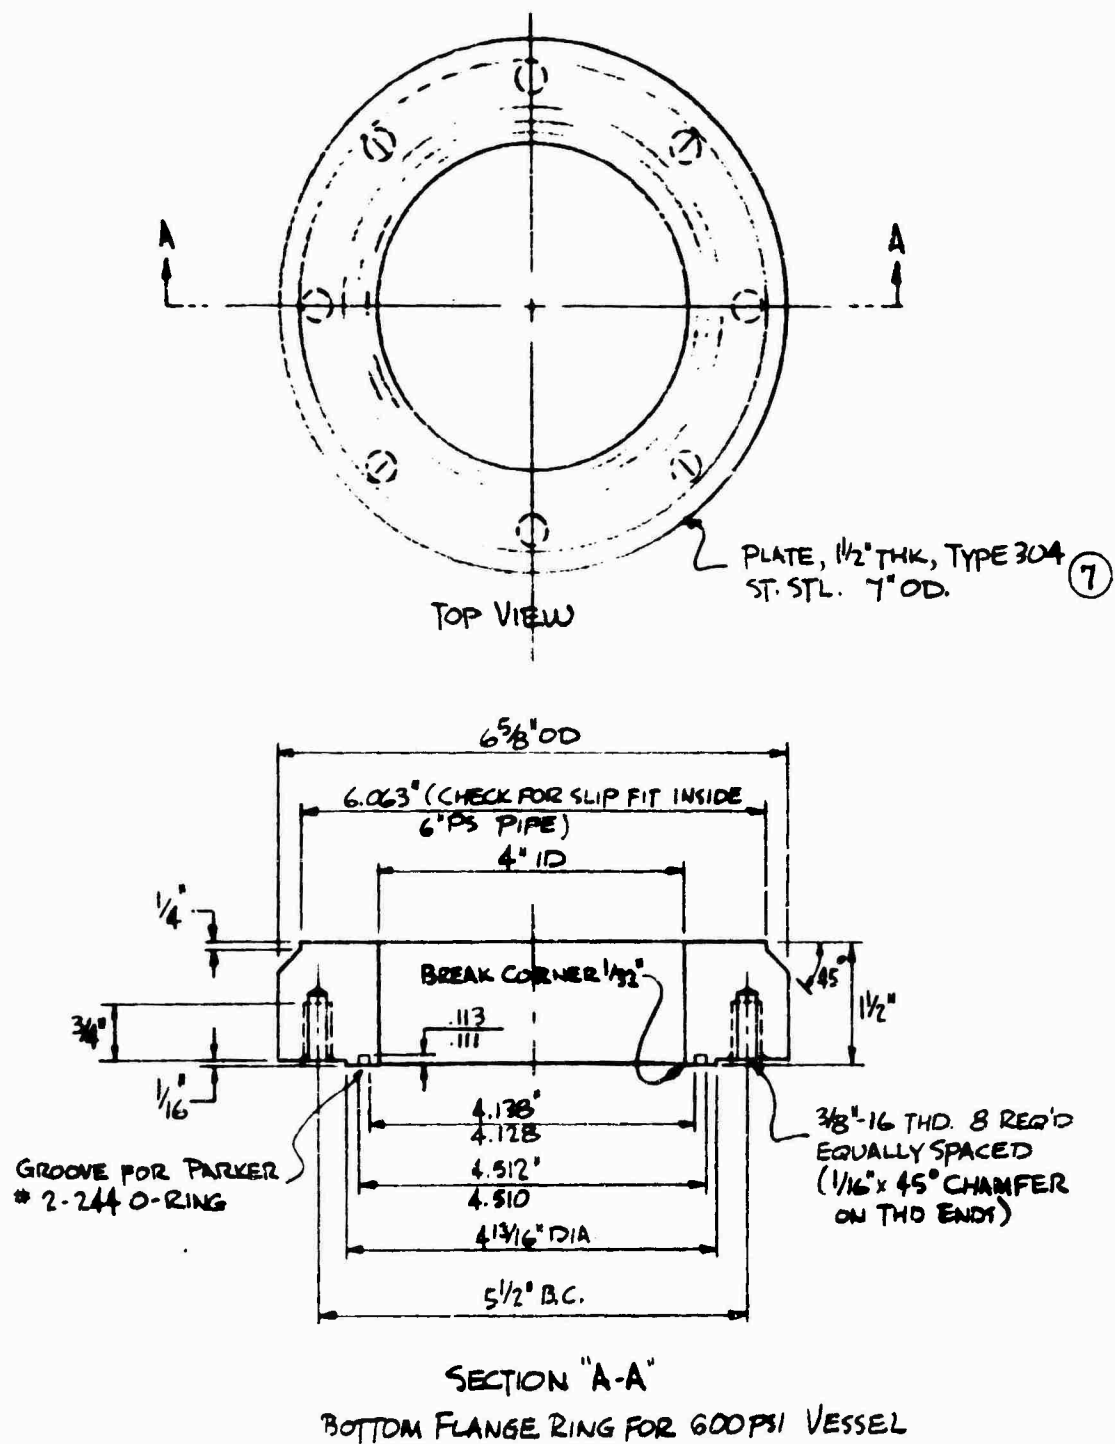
Six-inch pressure vessel. Bottom flange ring detail
